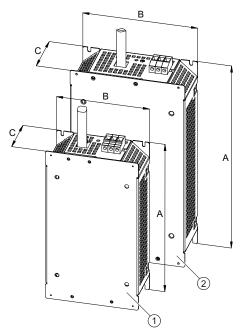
Dimension drawing, motor reactor, frame size FSA
